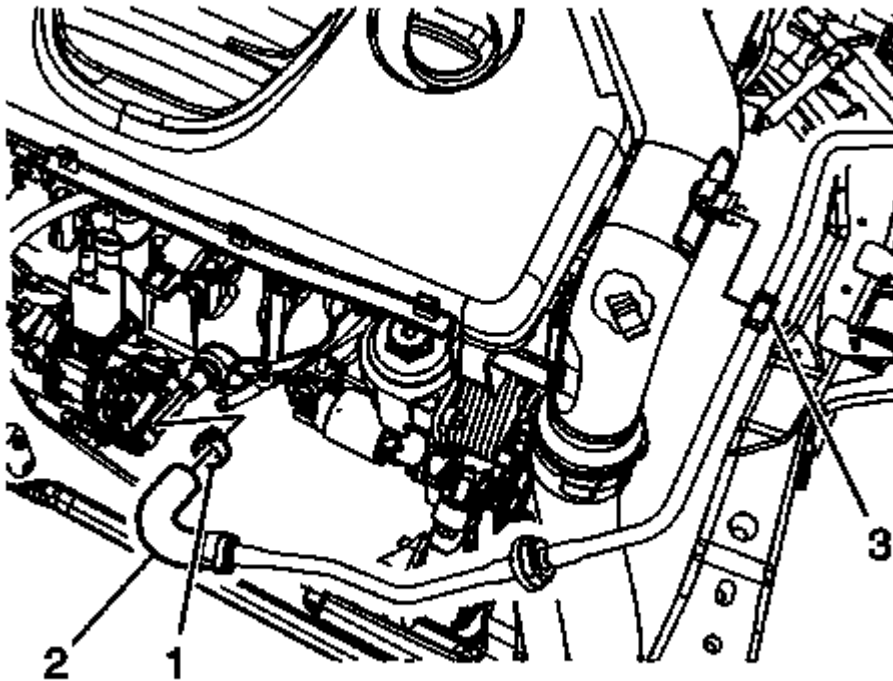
Power Brake Booster Vacuum Pipe Clamp
